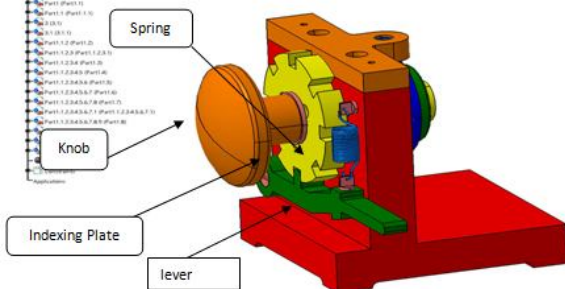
3d Model of complete assembly of indexing jig in front view
